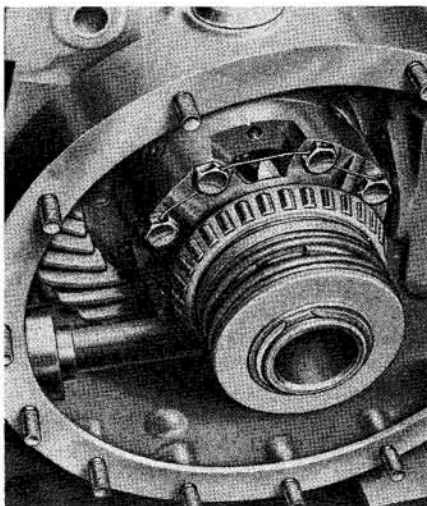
E — Differential lock coupling can be inspected or renewed with R. H. axle housing removed as shown.
